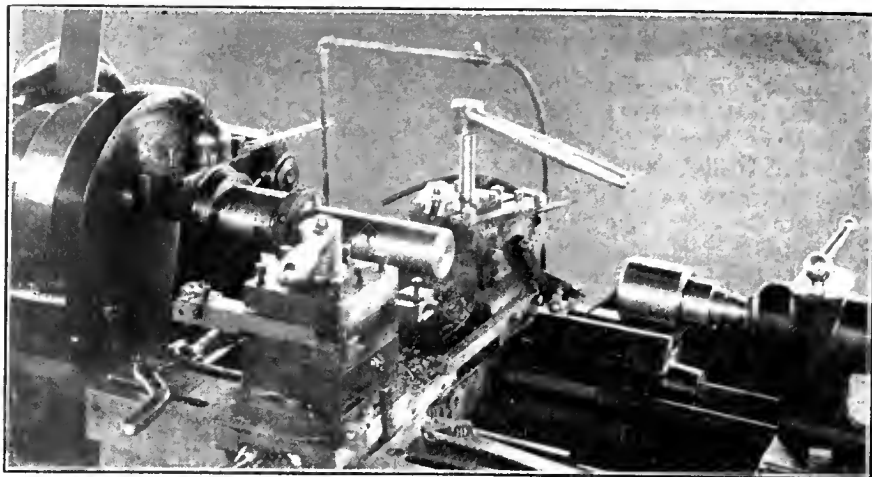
CUTTING GROOVE AND FINISHING BASE ON SPECIALLY EQUIPPED ENGINE LATHE
